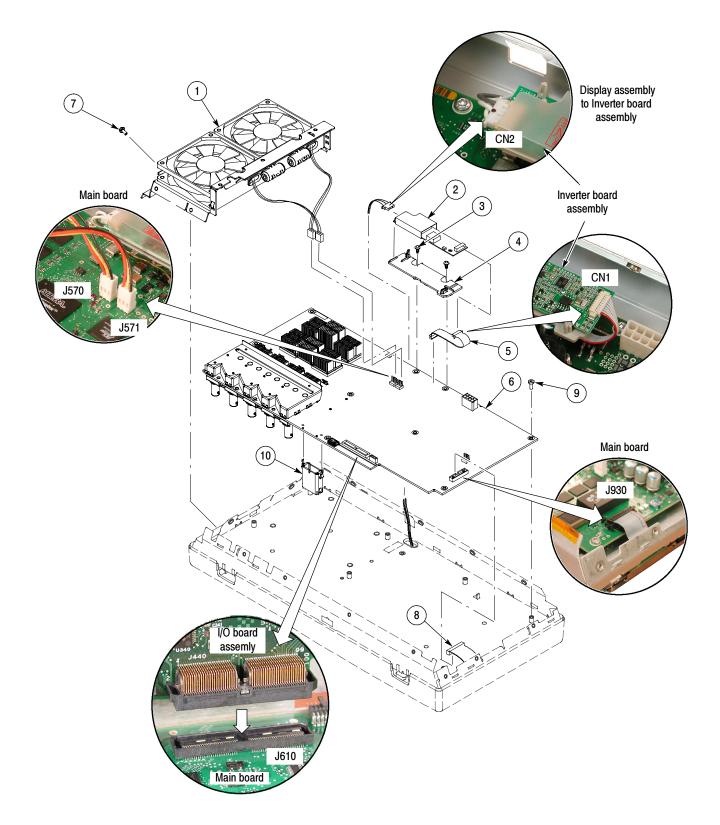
Exploded view: MSO4000 Main board, Inverter board, and side fans
